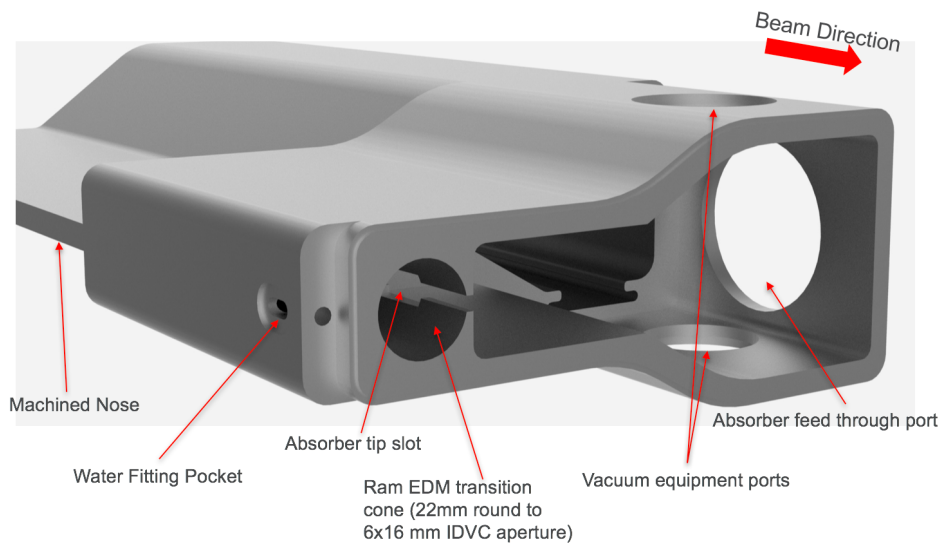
View of the downstream end box, which is machined into the end of the extrusion.
